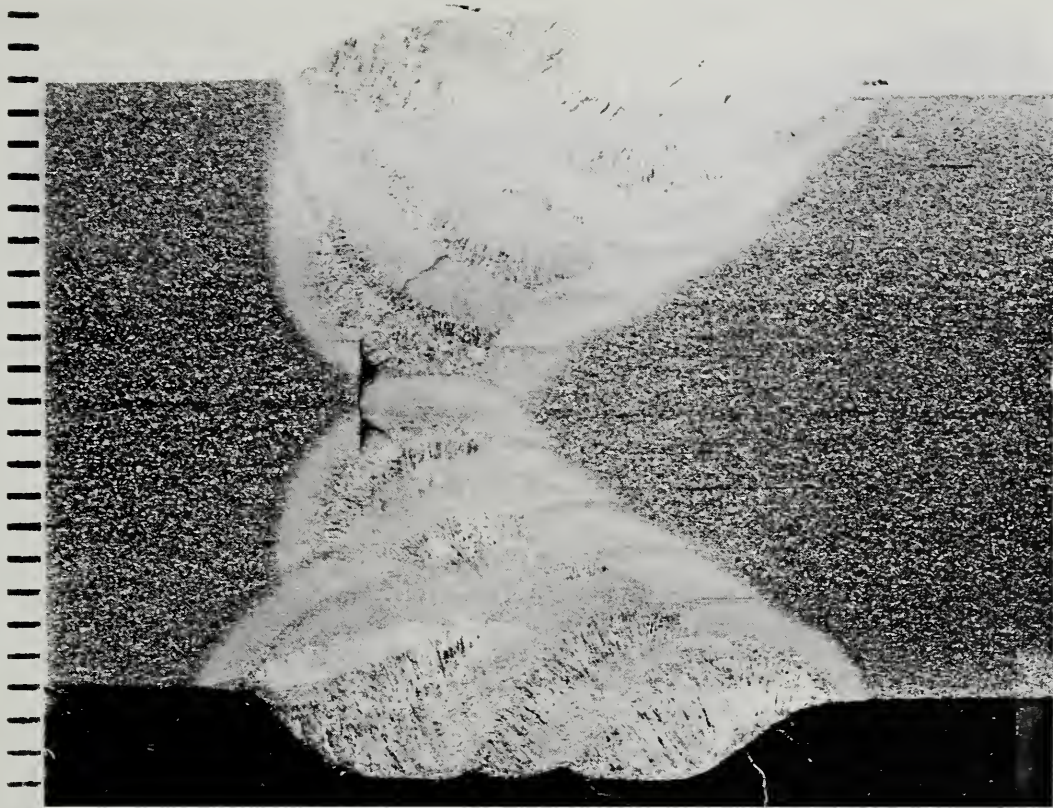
Cross section showing the weld in specimen NBS 6-W1 (x 4)
